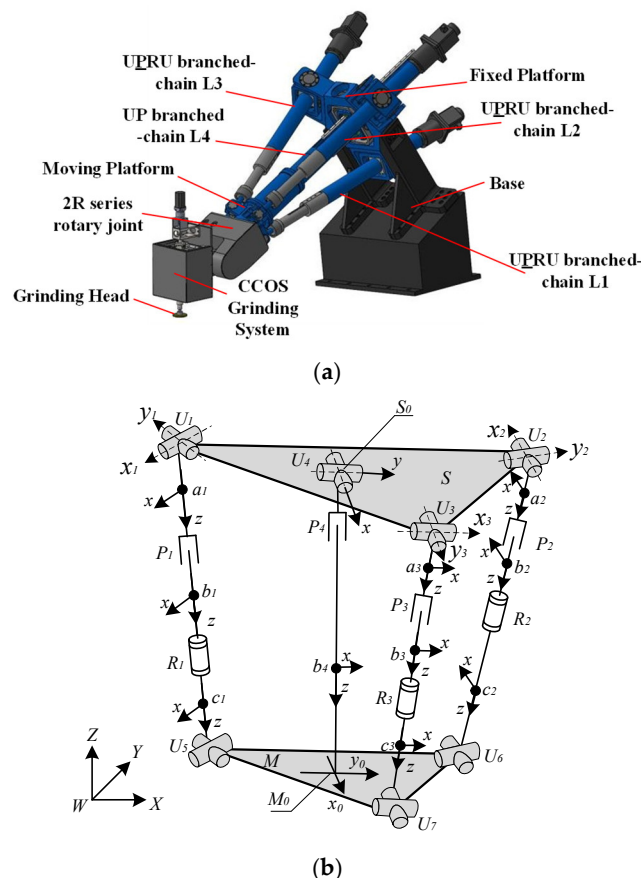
Hybrid processing robot: (a) 3D structure, (b) schema.
